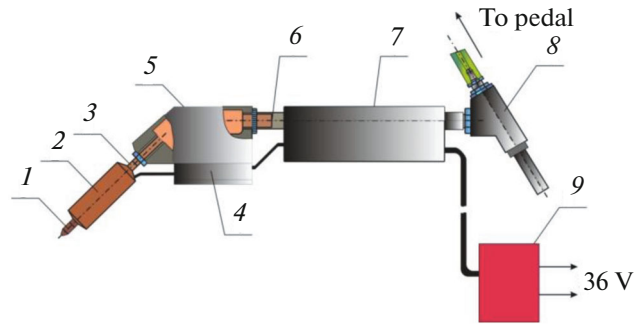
Soldering iron for electronic component removal: (1) interchangeable tip, (2) heater, (3) hollow rod, (4) connector block, (5) solder collector, (6) nozzle, (7) handle, (8) injection nozzle, and (9) voltage regulator.
